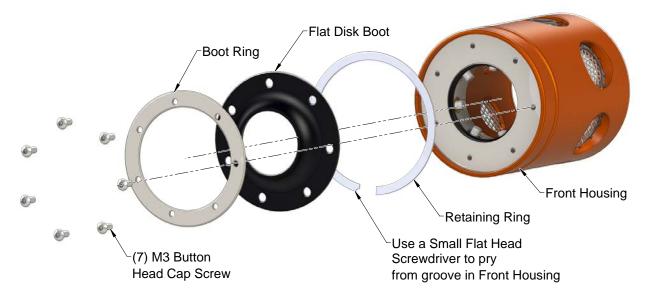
Installation of the Retaining Ring, Flat Disk Boot, and Boot Ring
